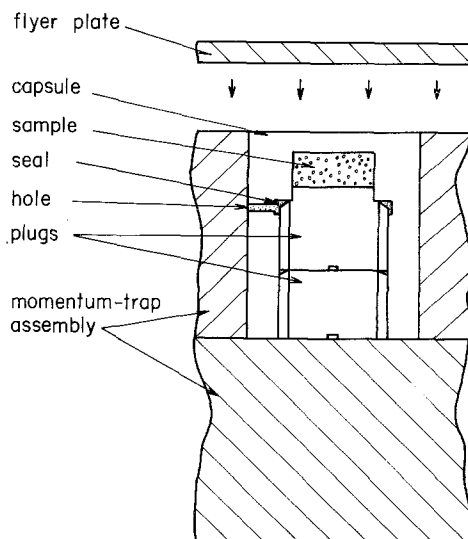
Cross-section of a stainless steel capsule and a momentum-trap assembly for shock compaction experiments using an explosively driven flat-flyer plate technique.
